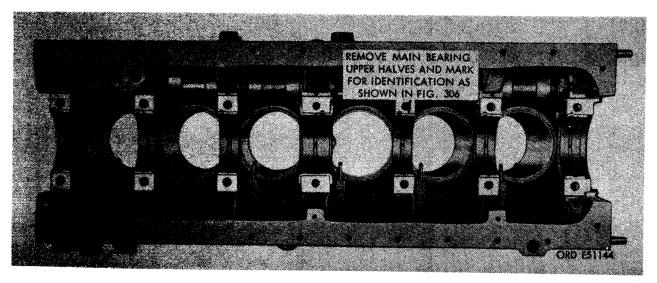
REMOVING OR INSTALLING MAIN BEARING UPPER HALVES.
